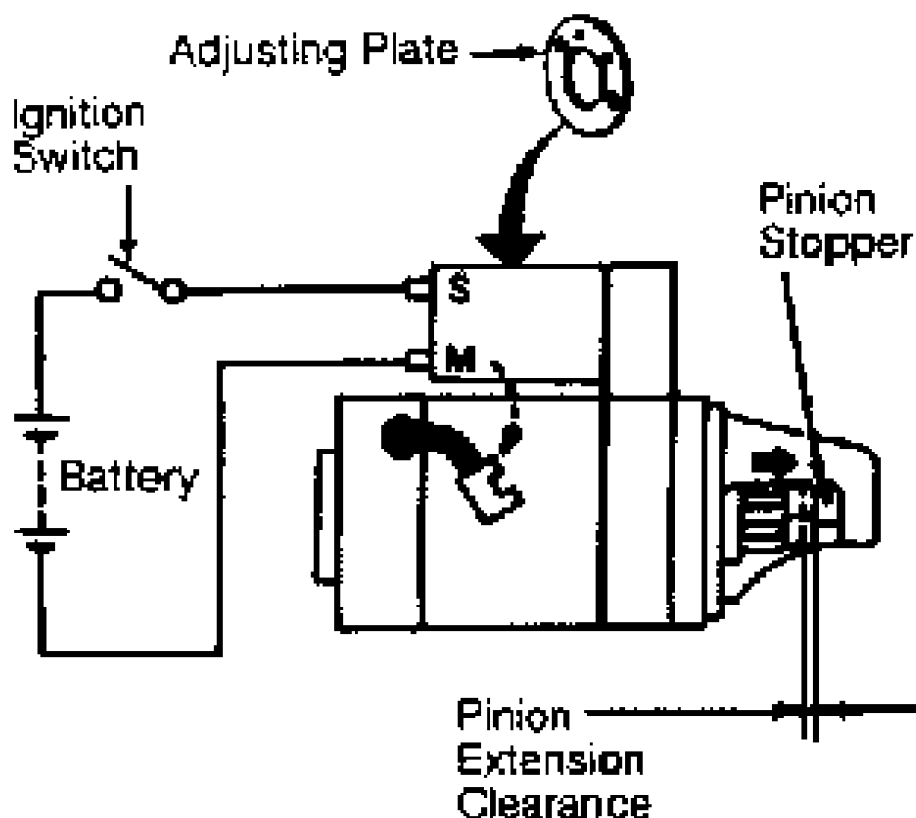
Checking Mitsubishi Starter Pinion Extension Clearance (G20 & Q45)
